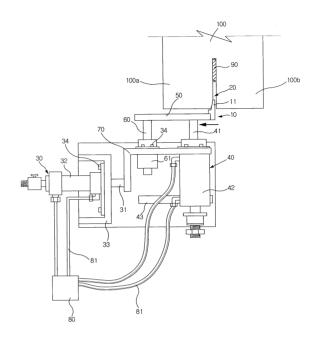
Plain view in which 2<sup>nd</sup> transfer means move and insert wedge into cutting groove
